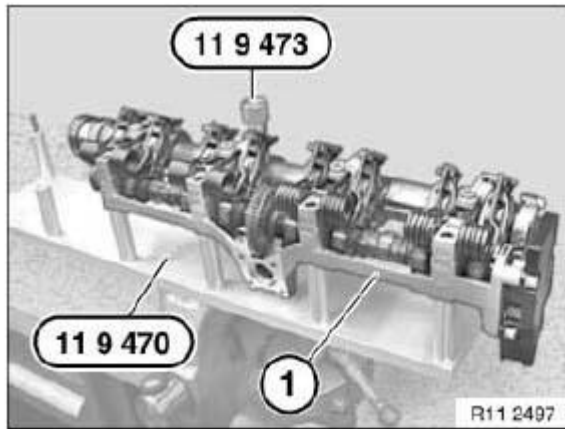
Identifying Special Tools (11 9 470) And (11 9 473)
